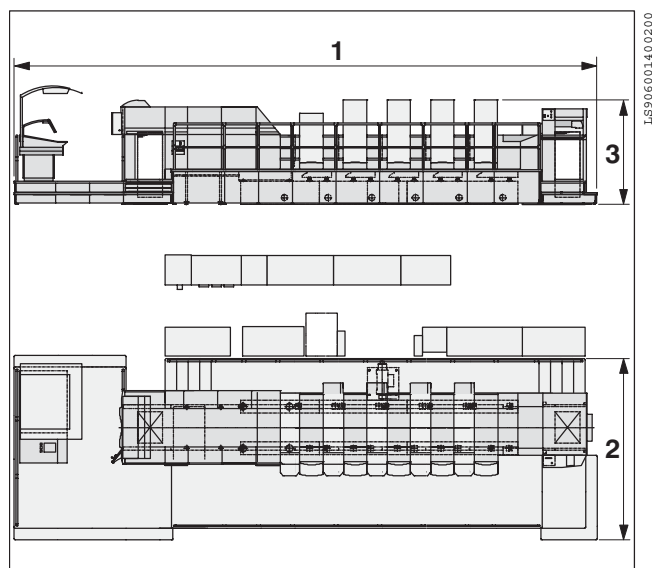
Dimensions of the printing press with DryStar UV in elevated installation (XL 75-4 + L)
